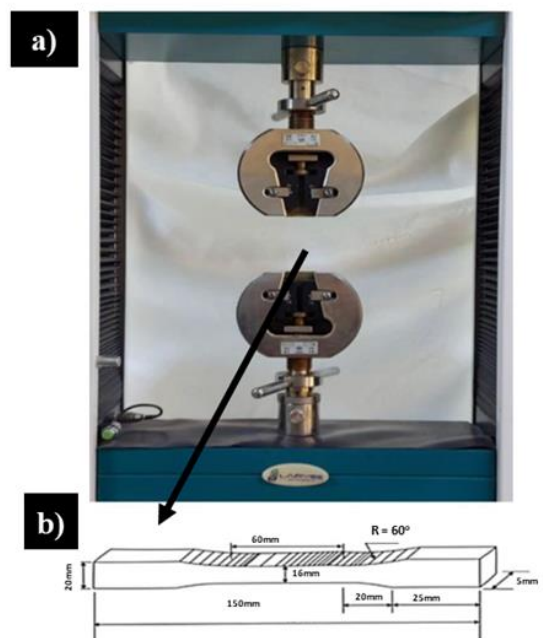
a) Tensile testing device, and b) schematic drawing of tensile specimens according to ASTM international standards
